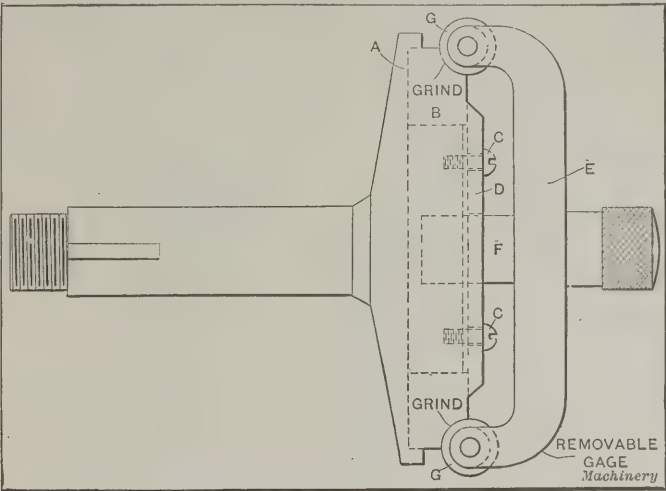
Fixture for Holding Ball Races for Grinding, and Gage for Testing Work
